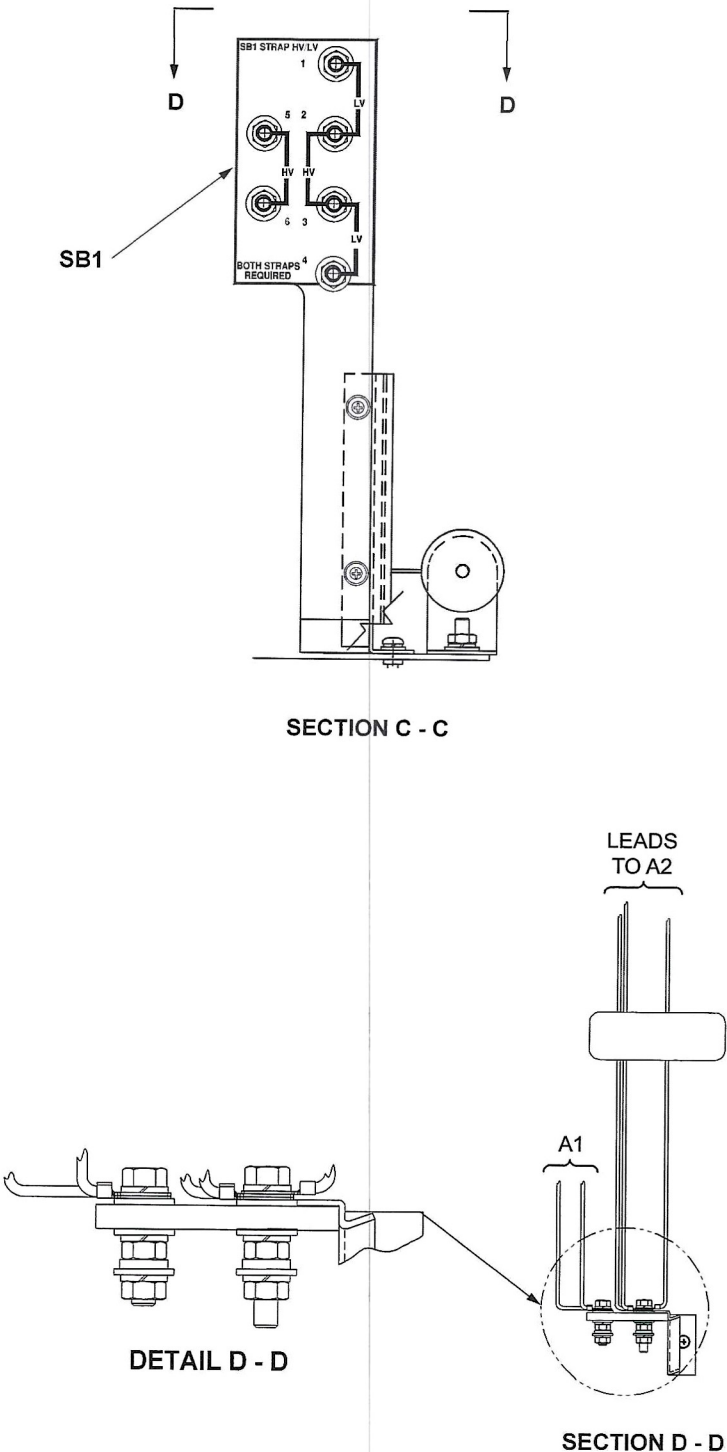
Magnetics Assembly – A3, Sheet 3 of 3
